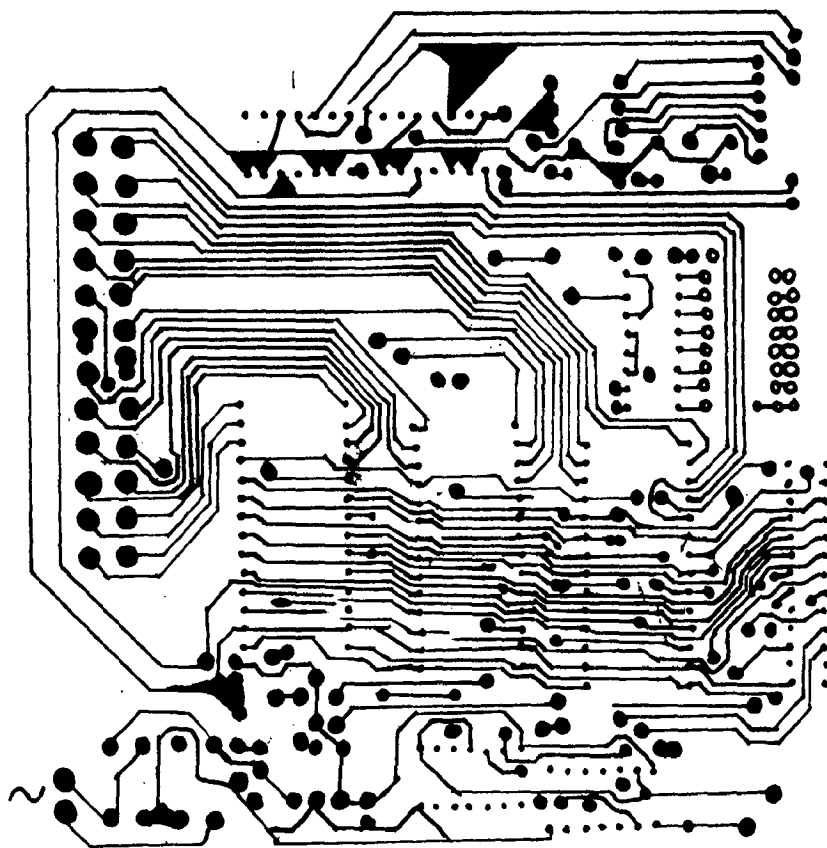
(b) -- ADC CARD PCB LAYOUT
